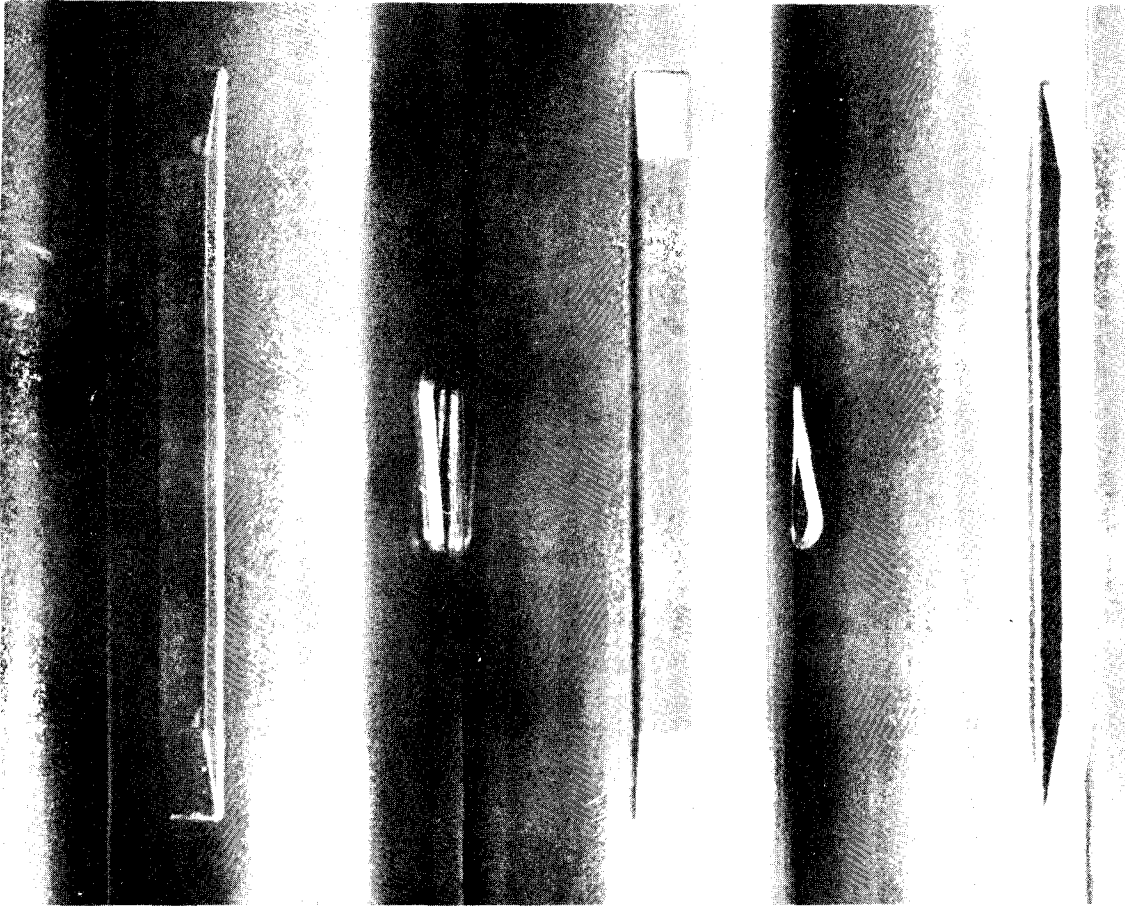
Close-up of Brazed Split Spacer and Bearing Pads
